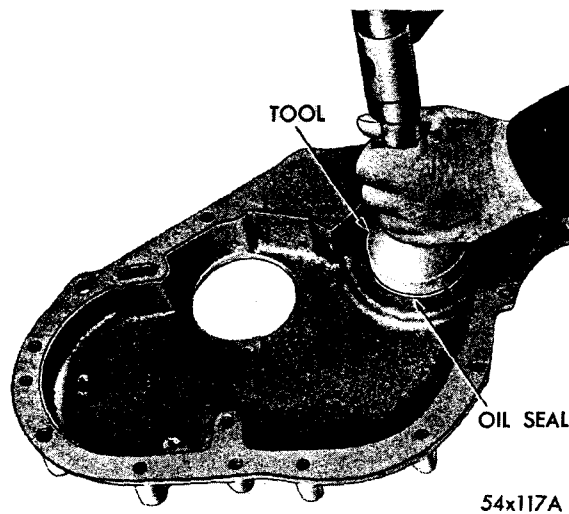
Removing the Accessory Drive Gear Case Cover Oil Seal with Tool C-3050
